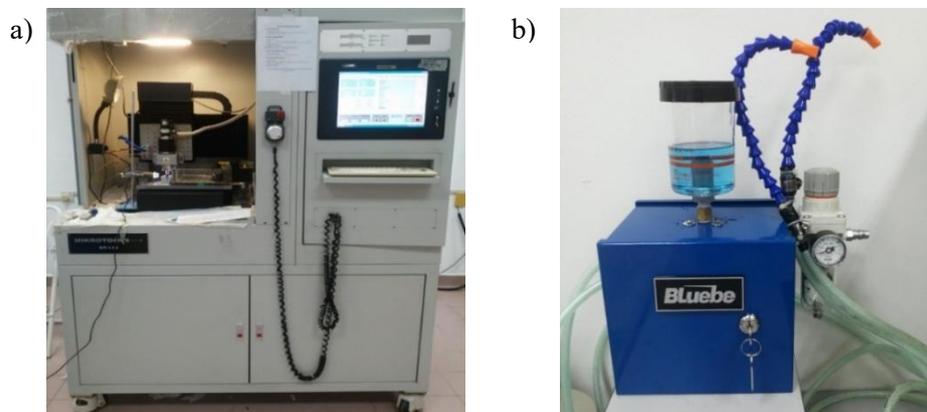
MICROTOOLS Integrated Machine DT-110(a) Bluebe MQL system(b).
